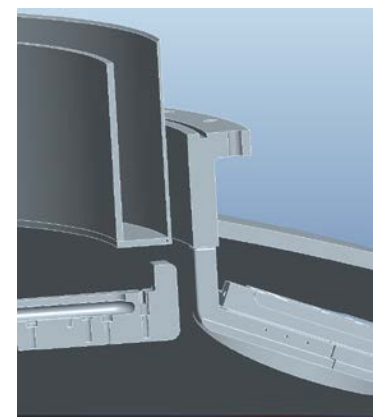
CAD model of the PF1c mandrel shell before revisions to the weld detail.
